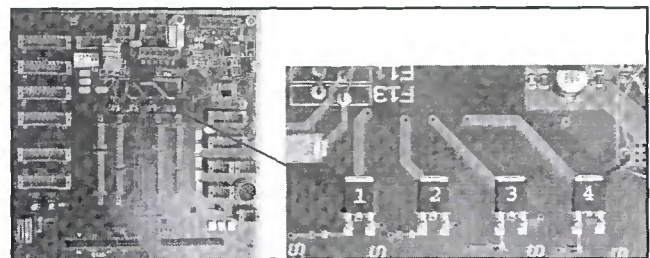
A — The surface mount assemblies; B — enlarged Dpak power device on PCB.
